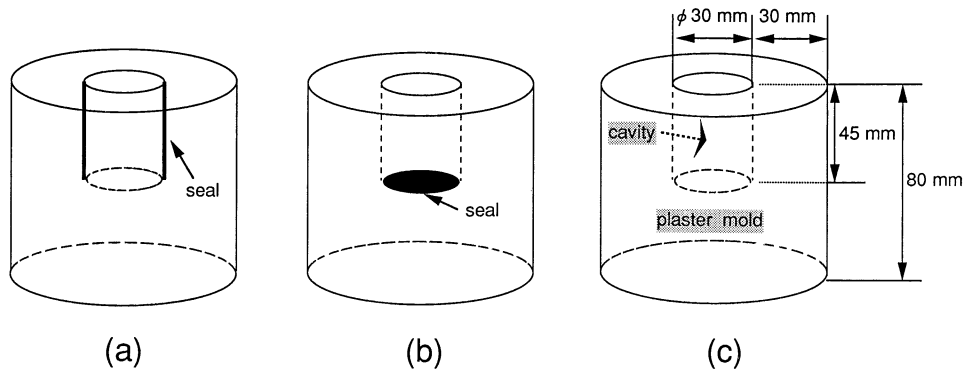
Schematic representation of plaster molds, illustrating a (a) bottom type, (b) side type and (c) side-bottom type.
